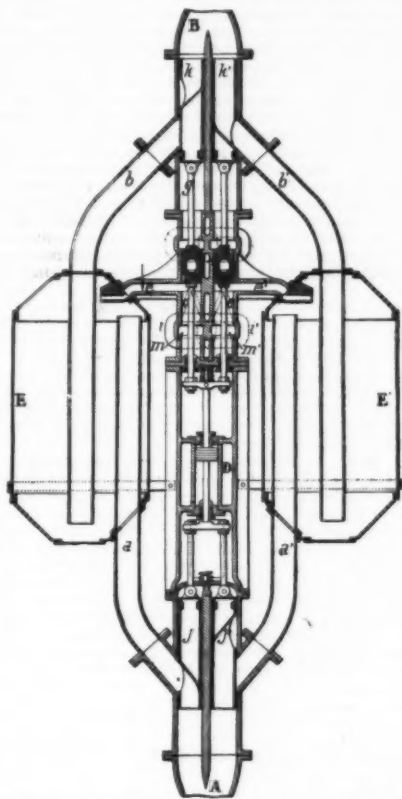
VERTICAL SECTION OF THE ELEVATOR.
